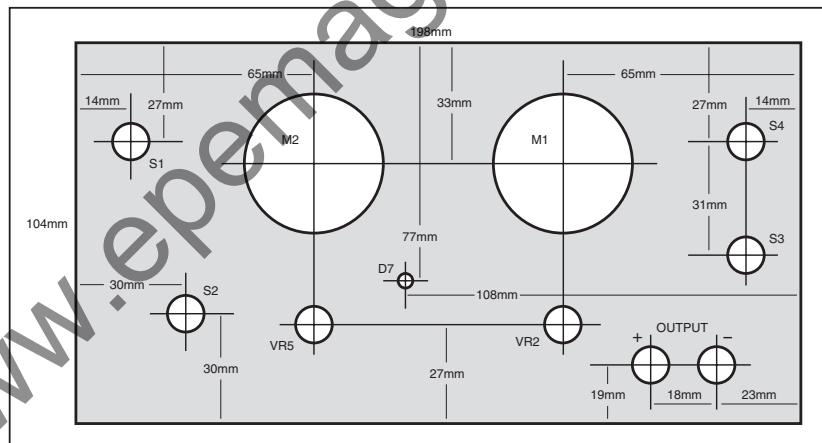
Front panel drilling details and dimensions. The general layout of components and front panel lettering are shown in the photograph below.
